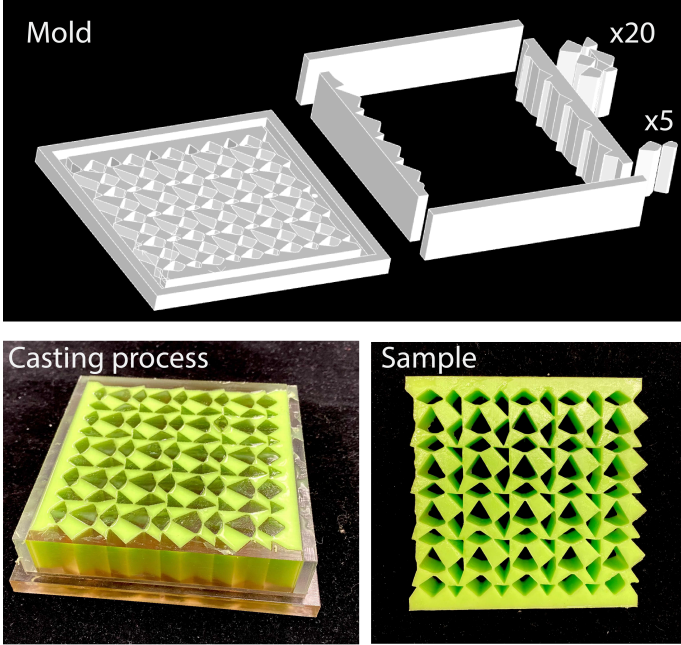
Fabrication: 3D-printed molds are used to cast the metamaterials.
